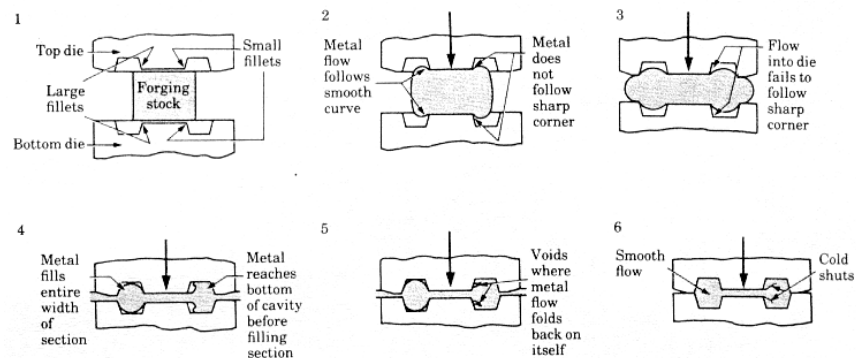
Effect of fillet radius on defect formation in forging. Small fillets (right side of drawings) cause the defects. *Source: ALCOA.
